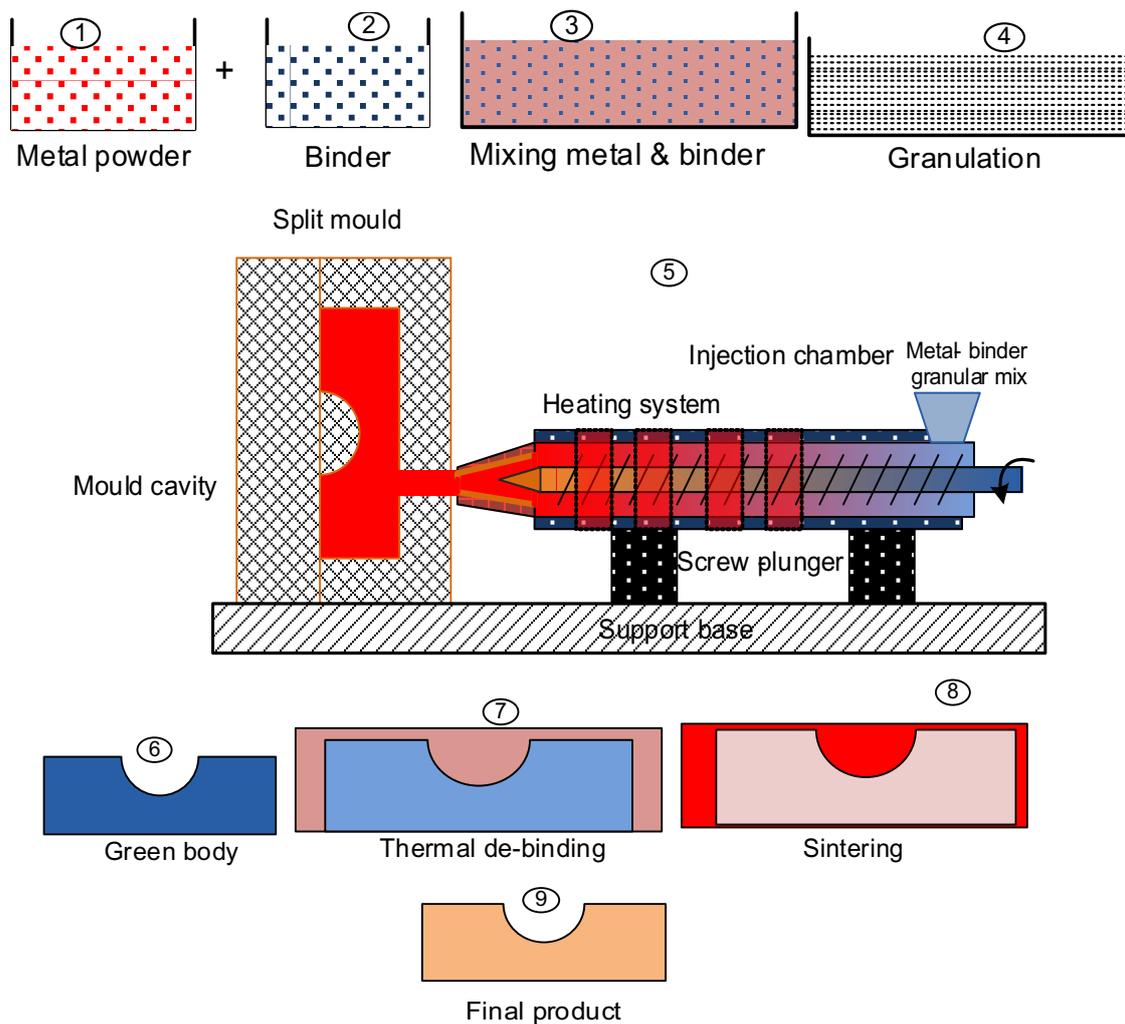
Schematic showing sequential steps of metal injection moulding process
